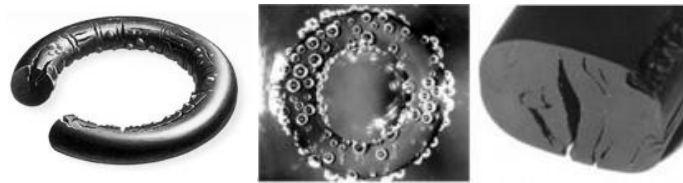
Examples of Explosive Decompression Damage Caused in Elastomers [70, 71]
